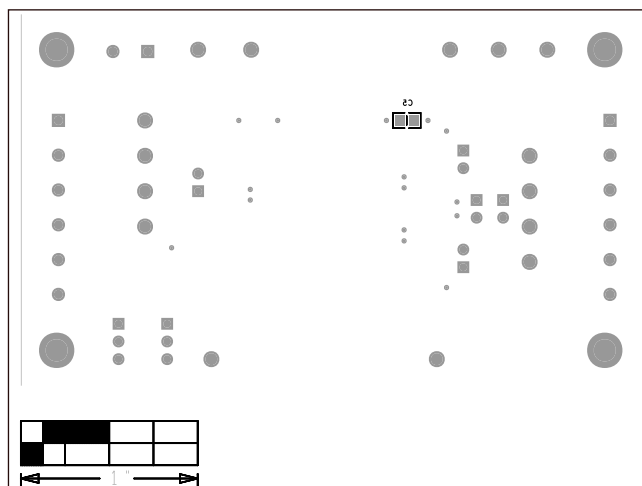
MAX148X2 EV Kit PCB Layout—Solder Side
